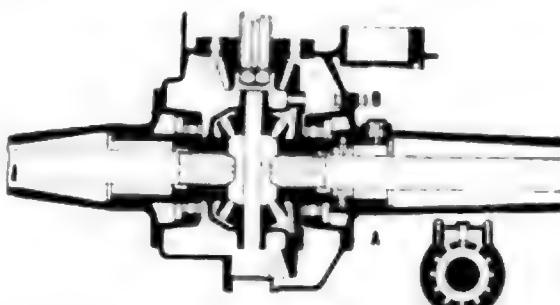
COMPENSATING GEAR, BY MESSRS. JOHN I. THORNEYCROFT, LTD.
